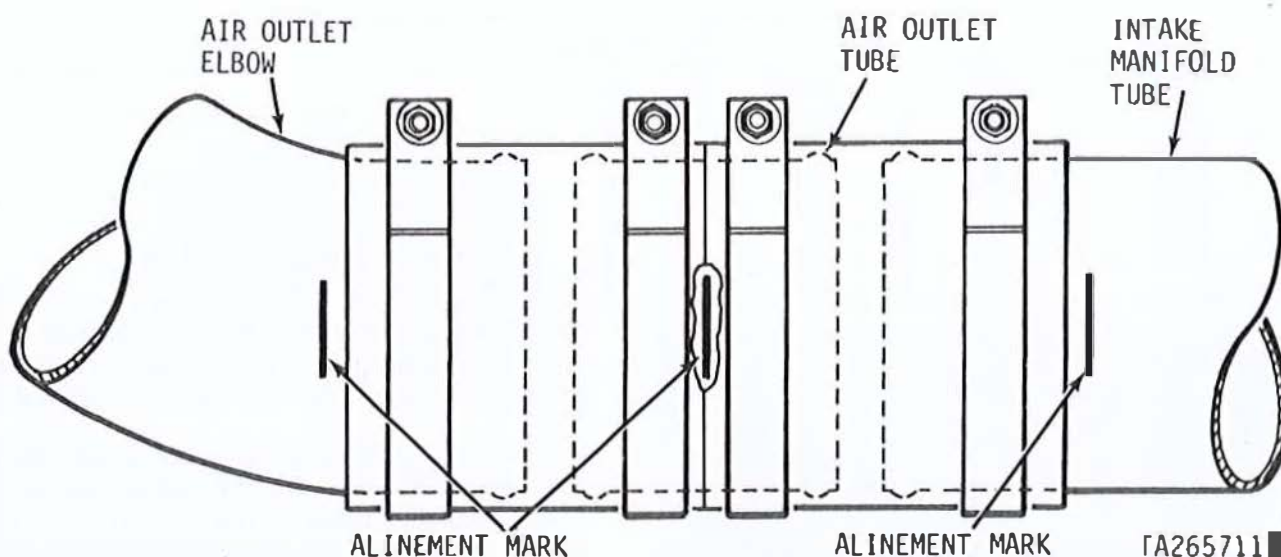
Alinement of Intake manifold tubes and hoses.
